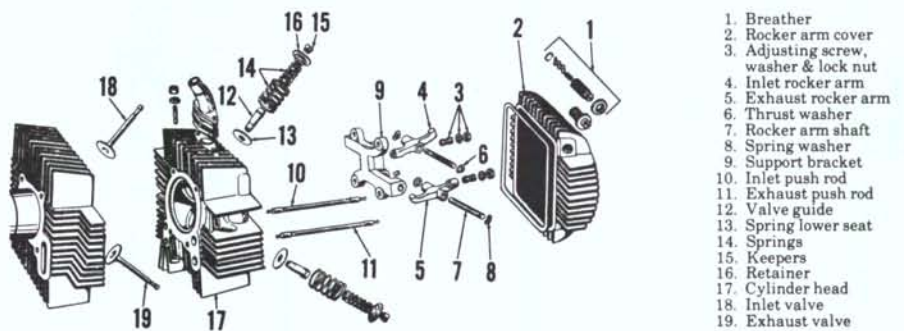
Exploded view of the cylinder head and rocker arms.
